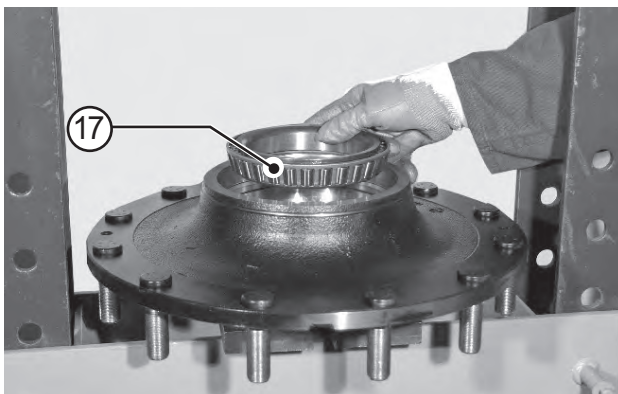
Fit the bearing (17) and seal ring (18) into the internal thrust block.
